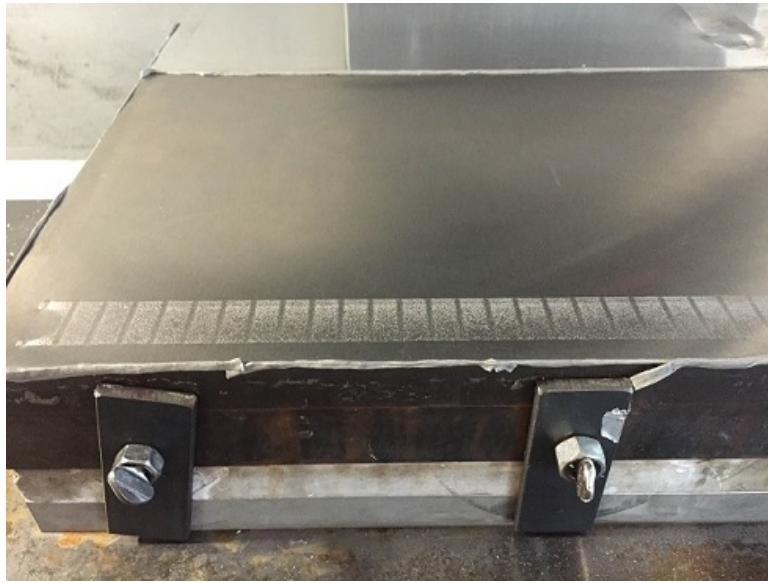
OSU vacuum chuck pattern revealed through welder pass.
